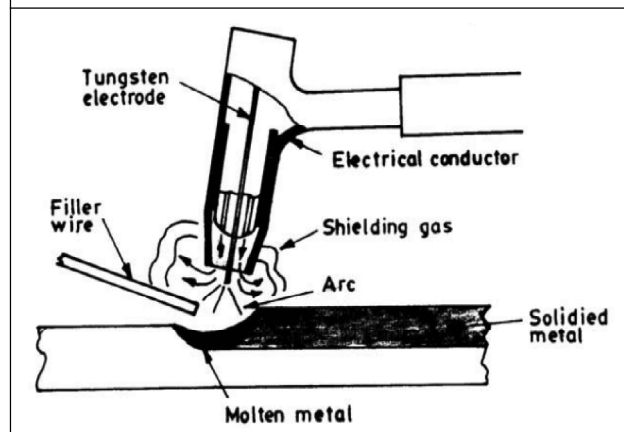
Schematic of a Gas Tungsten Arc Welding Technique
